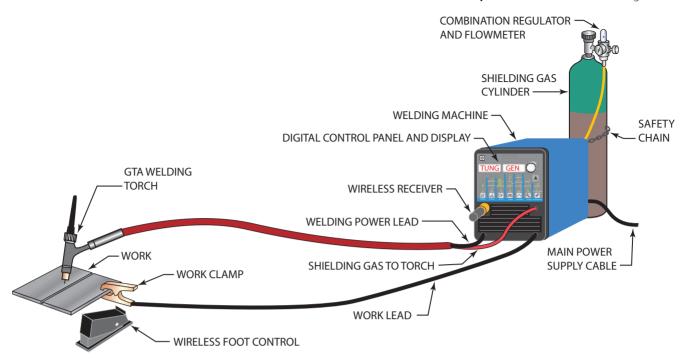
Gas tungsten arc welding equipment.
